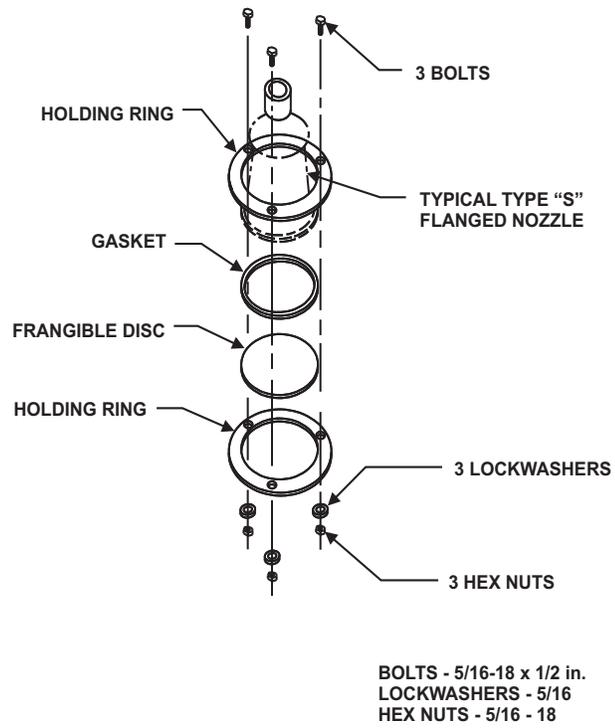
Flanged Nozzle Mounting Kit (Orifice Protection Only)
